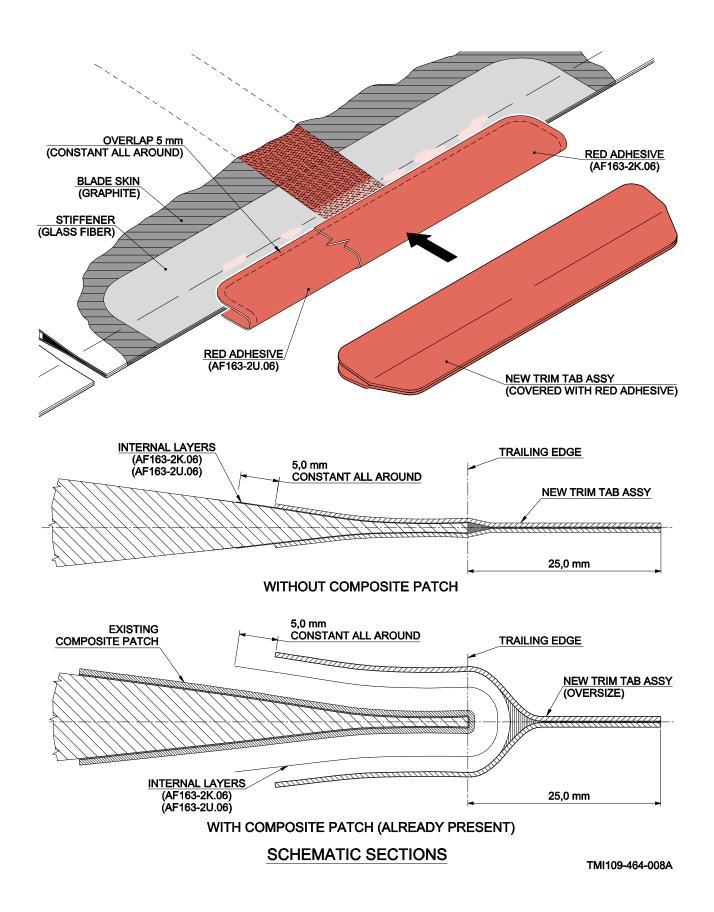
Main rotor blade - Replacement of the trim tab (assembly installation).
